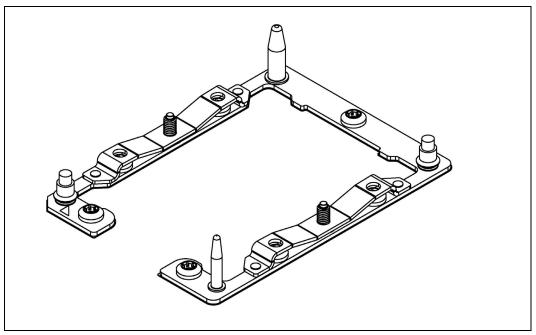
Narrow Fabric Bolster Plate Assembly (ISO View)
